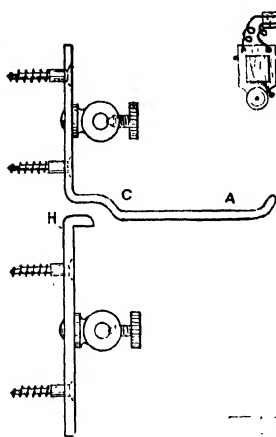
Top and Bottom Contact Pieces of Electric Door Alarm.
